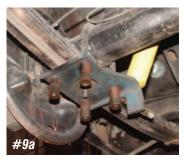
& 9b & 9c: Be sure the car is supported by the frame and not by the rear end and remove the four U-bolts and lower shock plates. Now the rear end can be removed from the car. A floor jack and a friend with a strong back will come in handy here.
